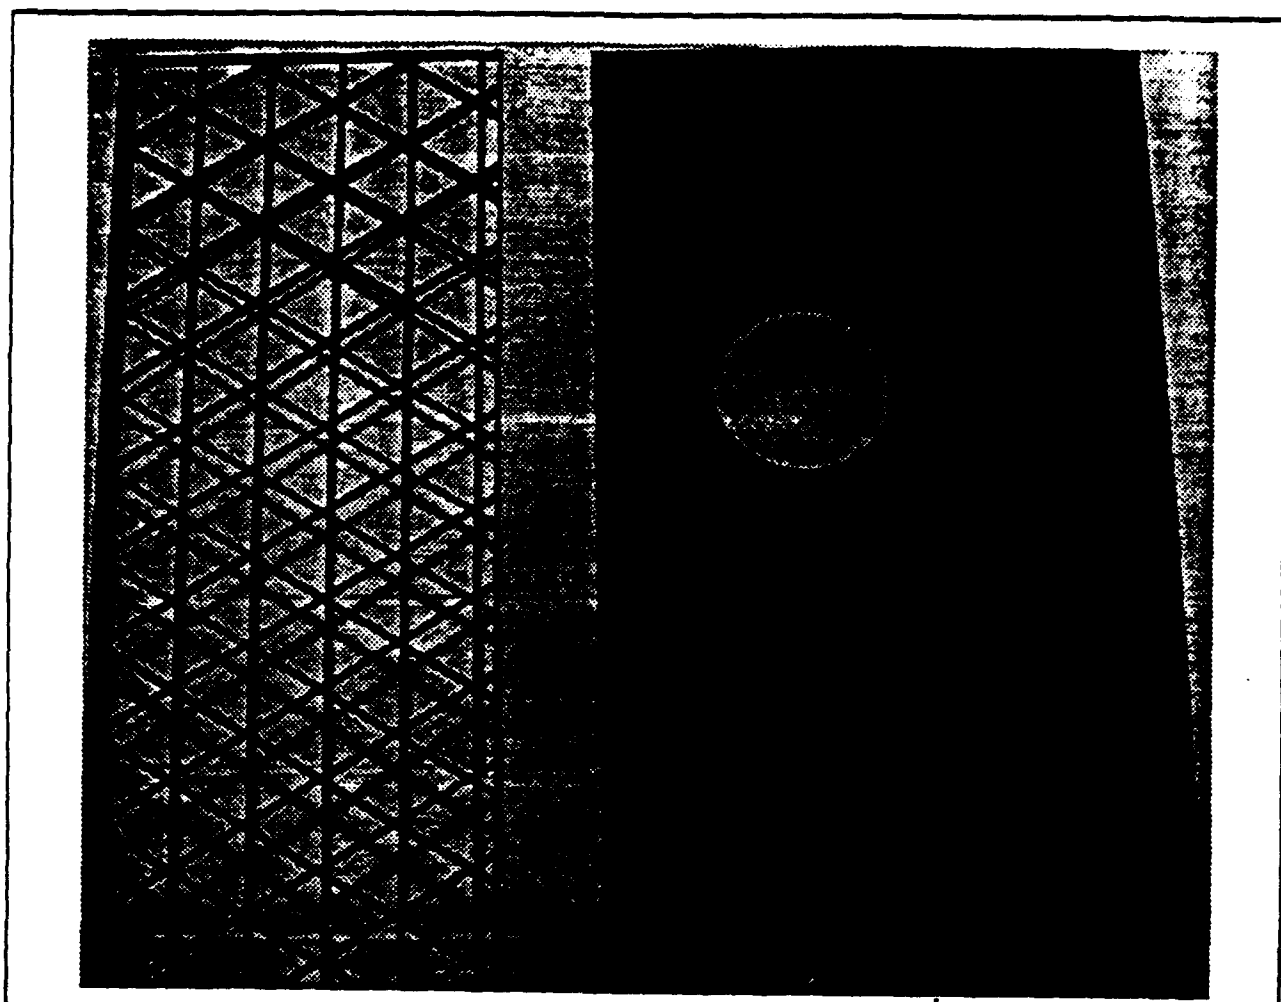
Inboard (left) and outboard (right) isogrid panels for Clementine. The inboard panel shown was manufactured without a skin layer. The inboard panel was approximately 46 in x 18 in, while the outboard panel was 46 in x 25 in.
